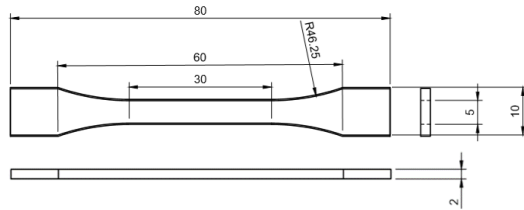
Dimension of tensile specimens (JIS K 7161 1BA). All dimension are in mm.
